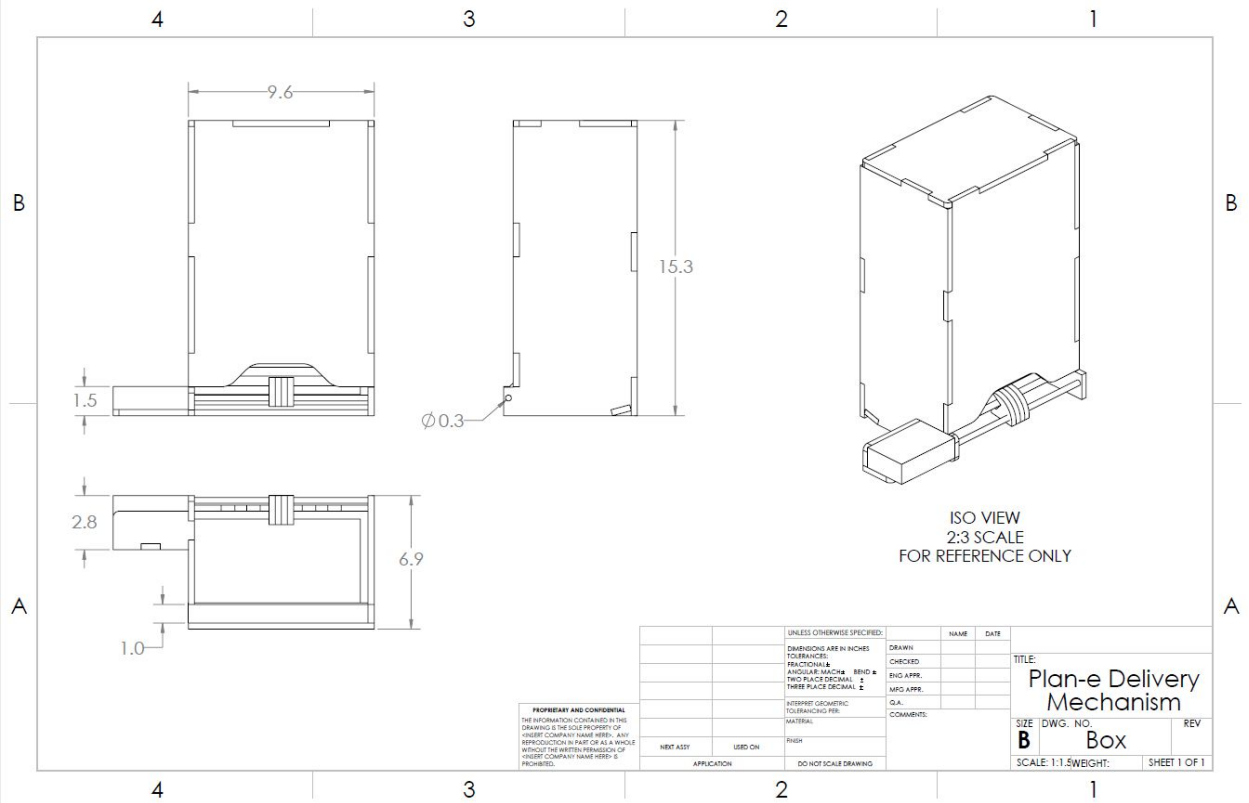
Delivery Mechanism Engineering Drawing with Relevant Dimensions
